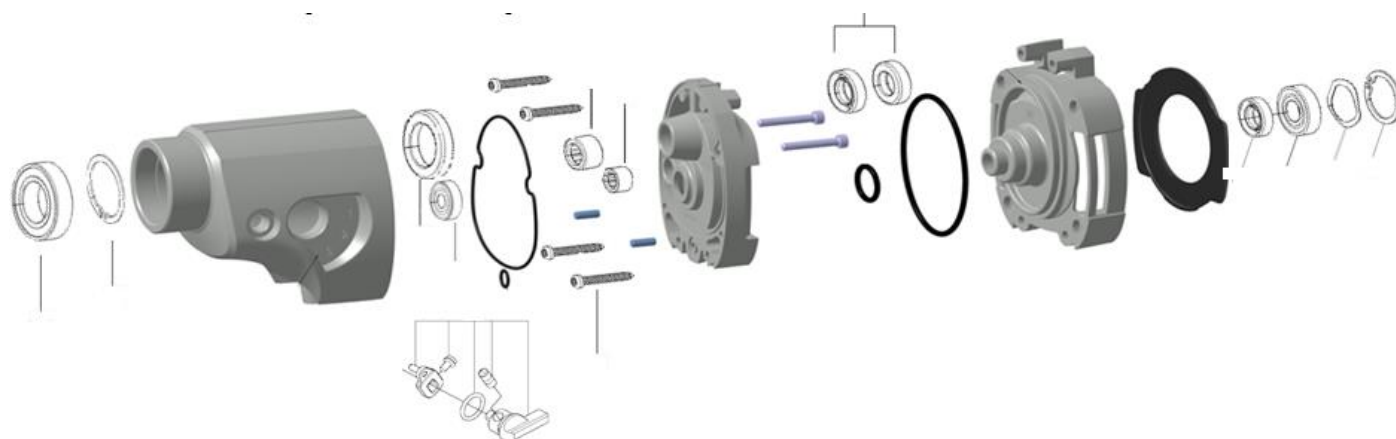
Parts included in Gearbox kit art. no. 588 61 30-01.
